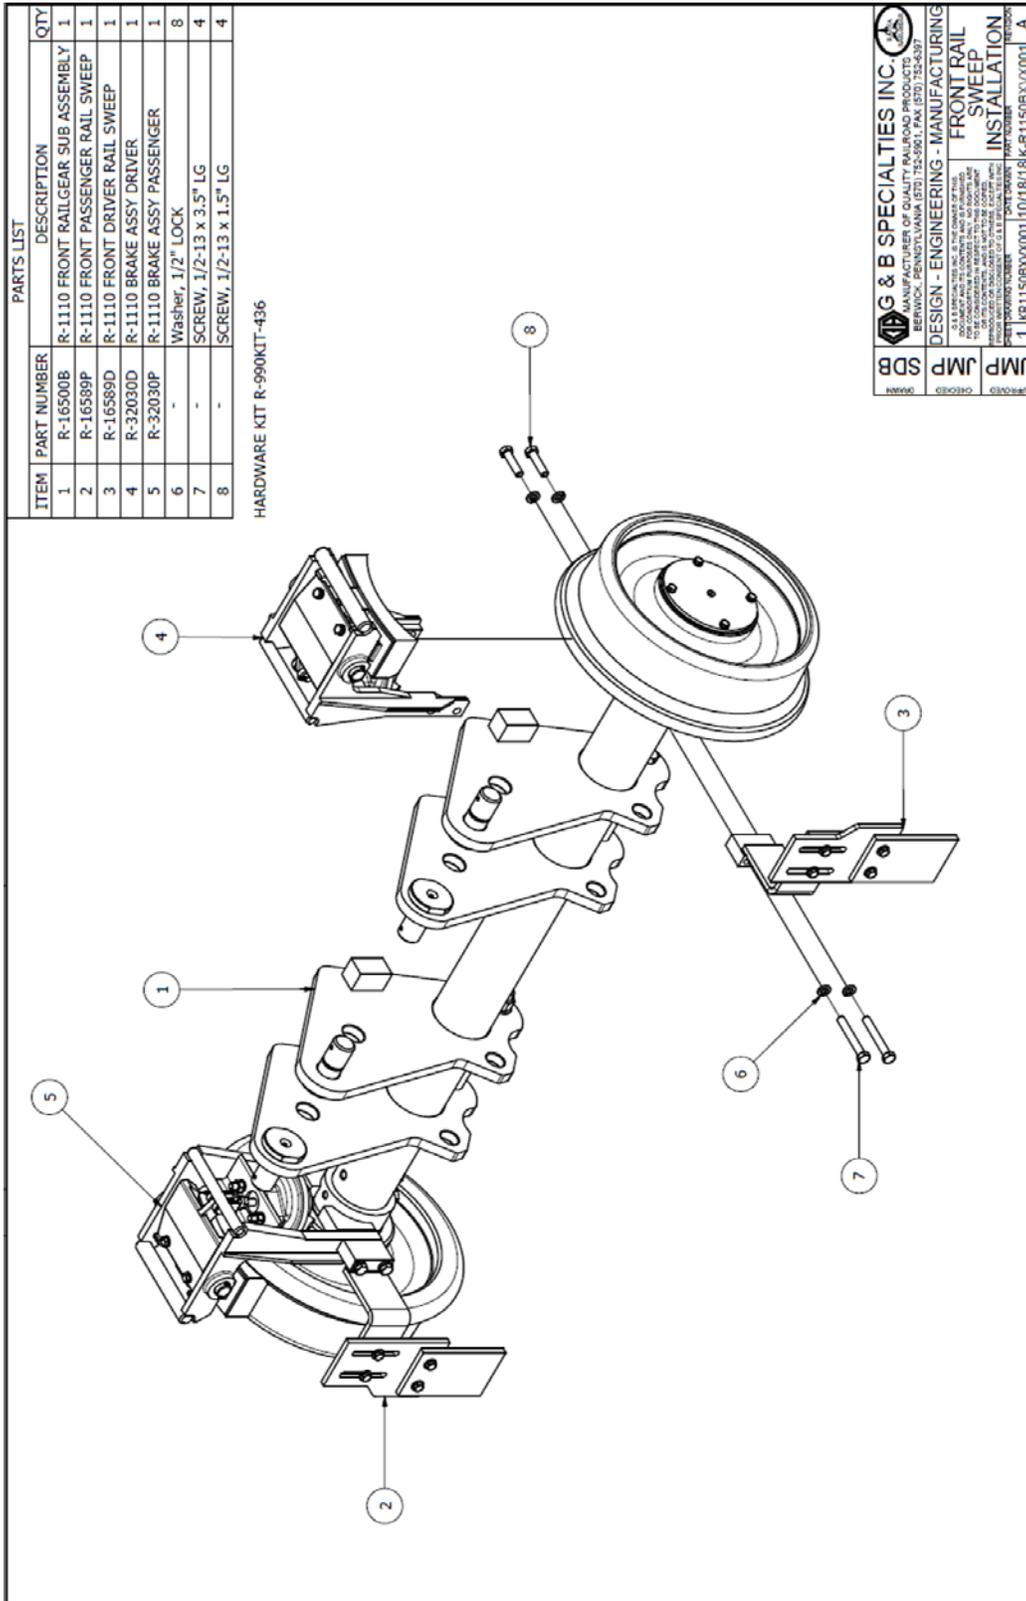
Rail Sweep Installation with Cobra Brakes
